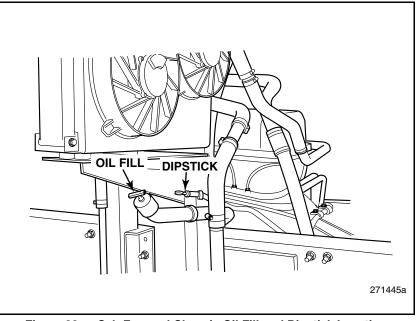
Cab Forward Chassis Oil Fill and Dipstick Location
